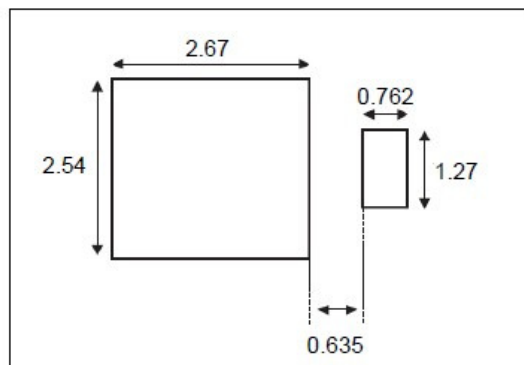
FOOT PRINT DIMENSION Print (mm)
